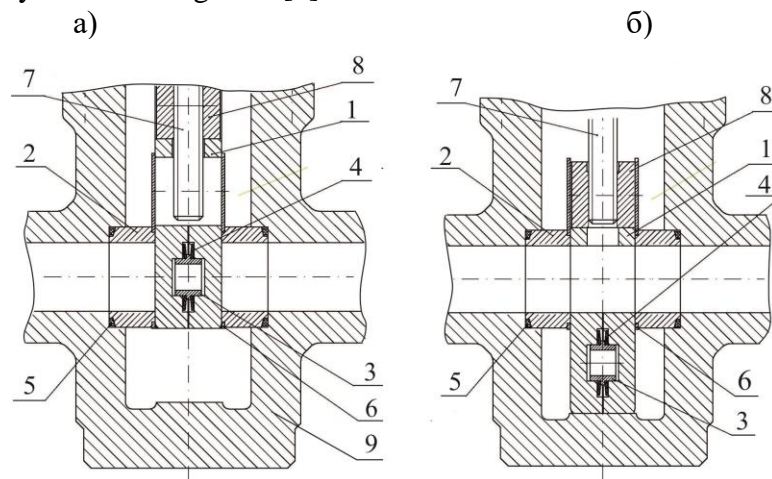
The yoke assembly gate valve of the drilling manifold
